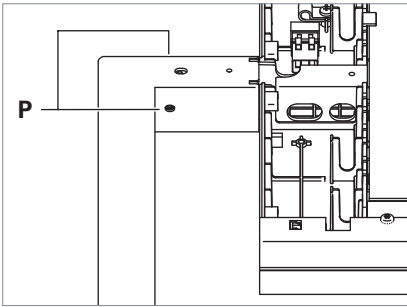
Aligning the luminaire head perpendicularly to the support tube.
